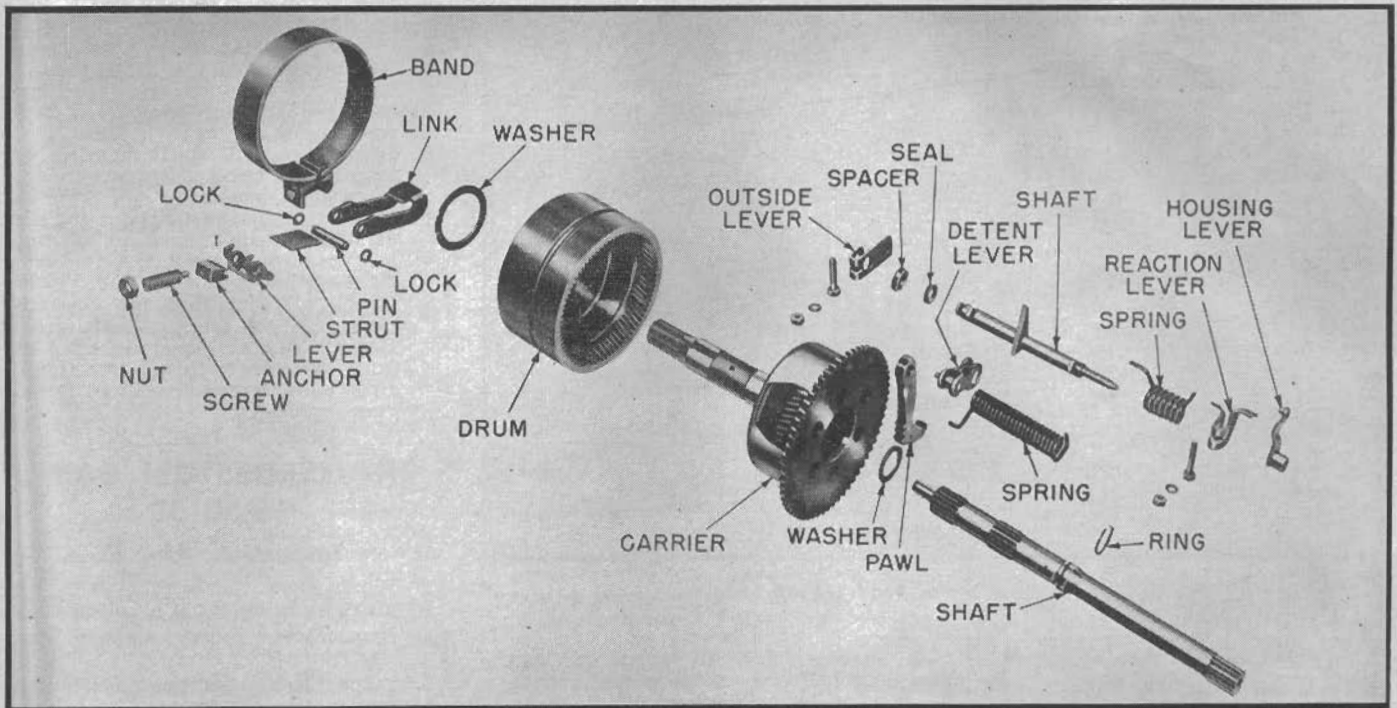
Exploded view of planet unit and related parts. 1950-59
